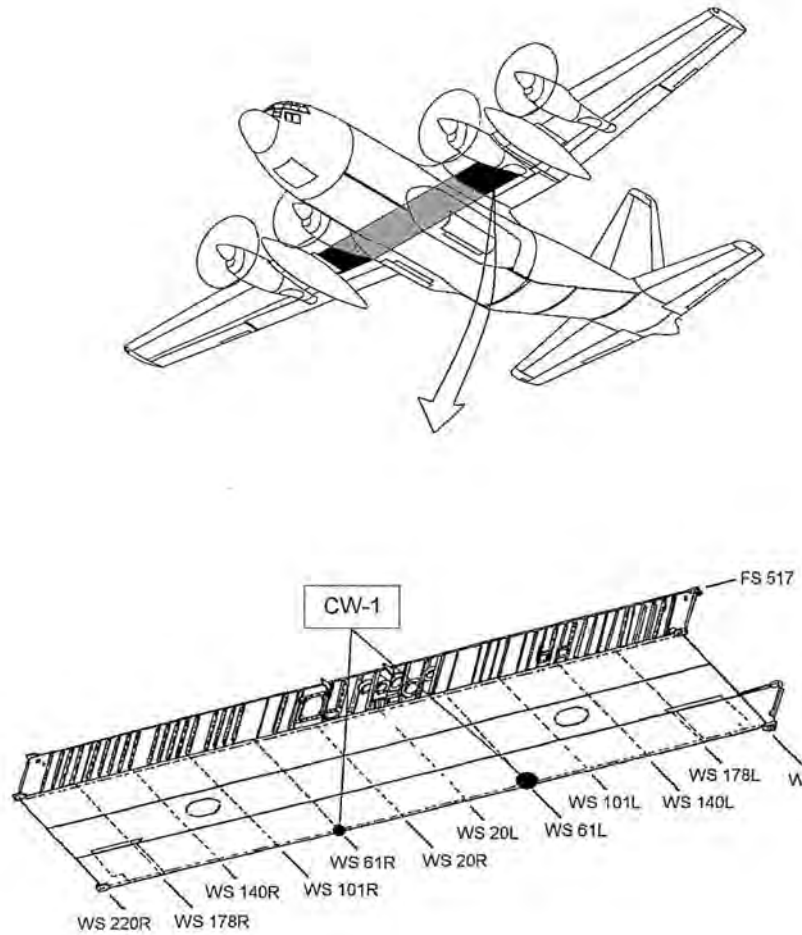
Location of cold-expanded hole on lower wing skin of C-130
